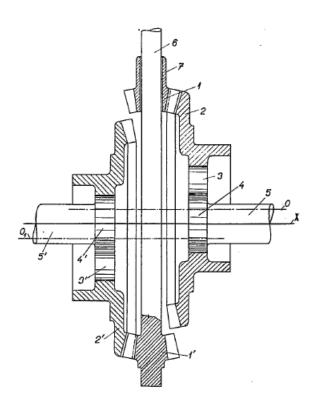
illustrates a toothed gearing with a fixed gear ratio and intermeshing gears (1), (2), (3), (4), (1'), (2'), (3'), and (4'). The gearing includes a driving shaft 6 and two driven shafts (5) and (5'). Torque flows from driving shaft (6) via bevel gears (1) and (2), internal gear (3) and external gear (4) to driven shaft (5); and from driving shaft (6) via bevel gears (1') and (2'), internal gear (3') and external gear (4') to driven shaft (5').
